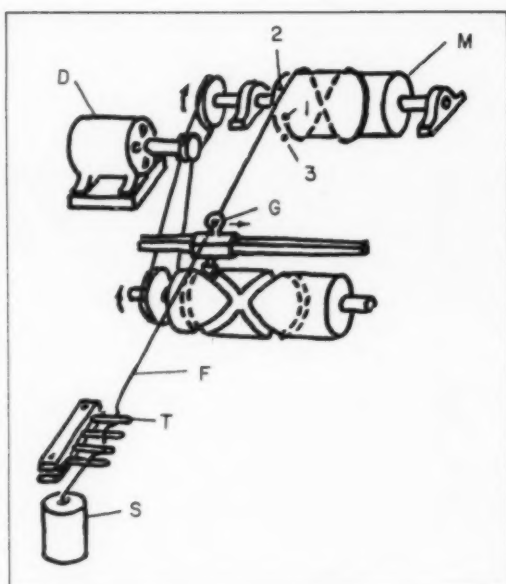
Schematic drawing of a basic filament winding set-up; showing filament source (S, T), filament (F), cam-follower guide (G), motor drive (D), and winding mandrel (M).
